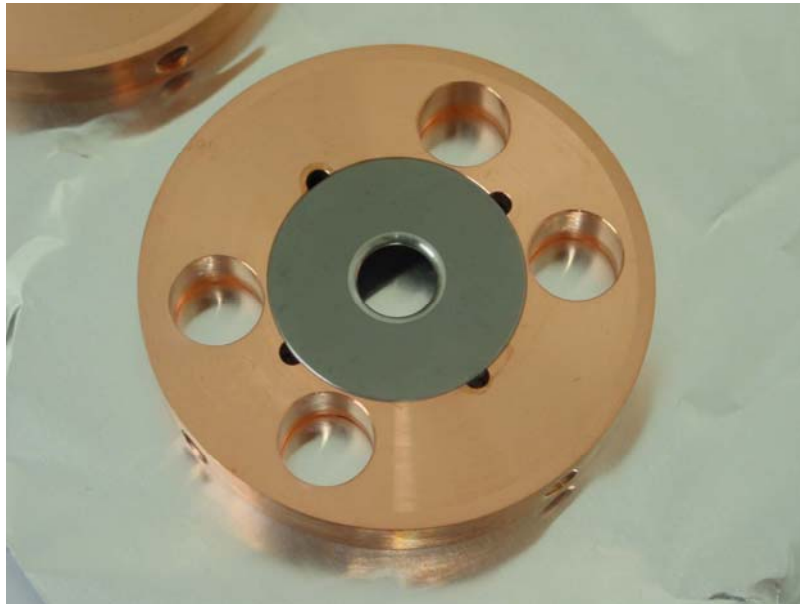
A molybdenum iris mounted in a copper disk, which forms a cell. The holes near the outer radius are used to bolt the cells together. The semi-circular holes just outside of the molybdenum disk allow gas to escape.
